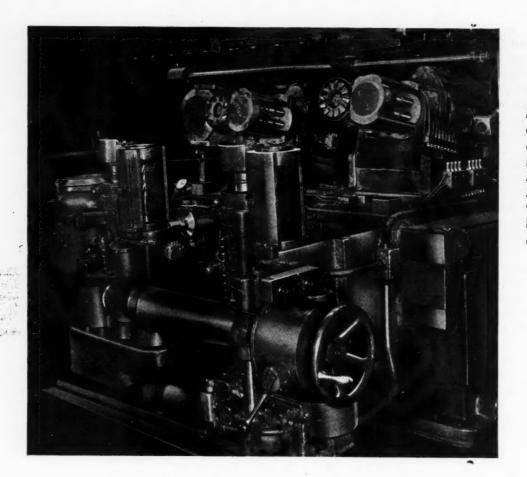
Another View of Some of the Cutters and Other Equipment Provided on One of the Machines Shown in the Heading Illustration. The Center Wing has been Removed to Give a Clear View of the Cutters
